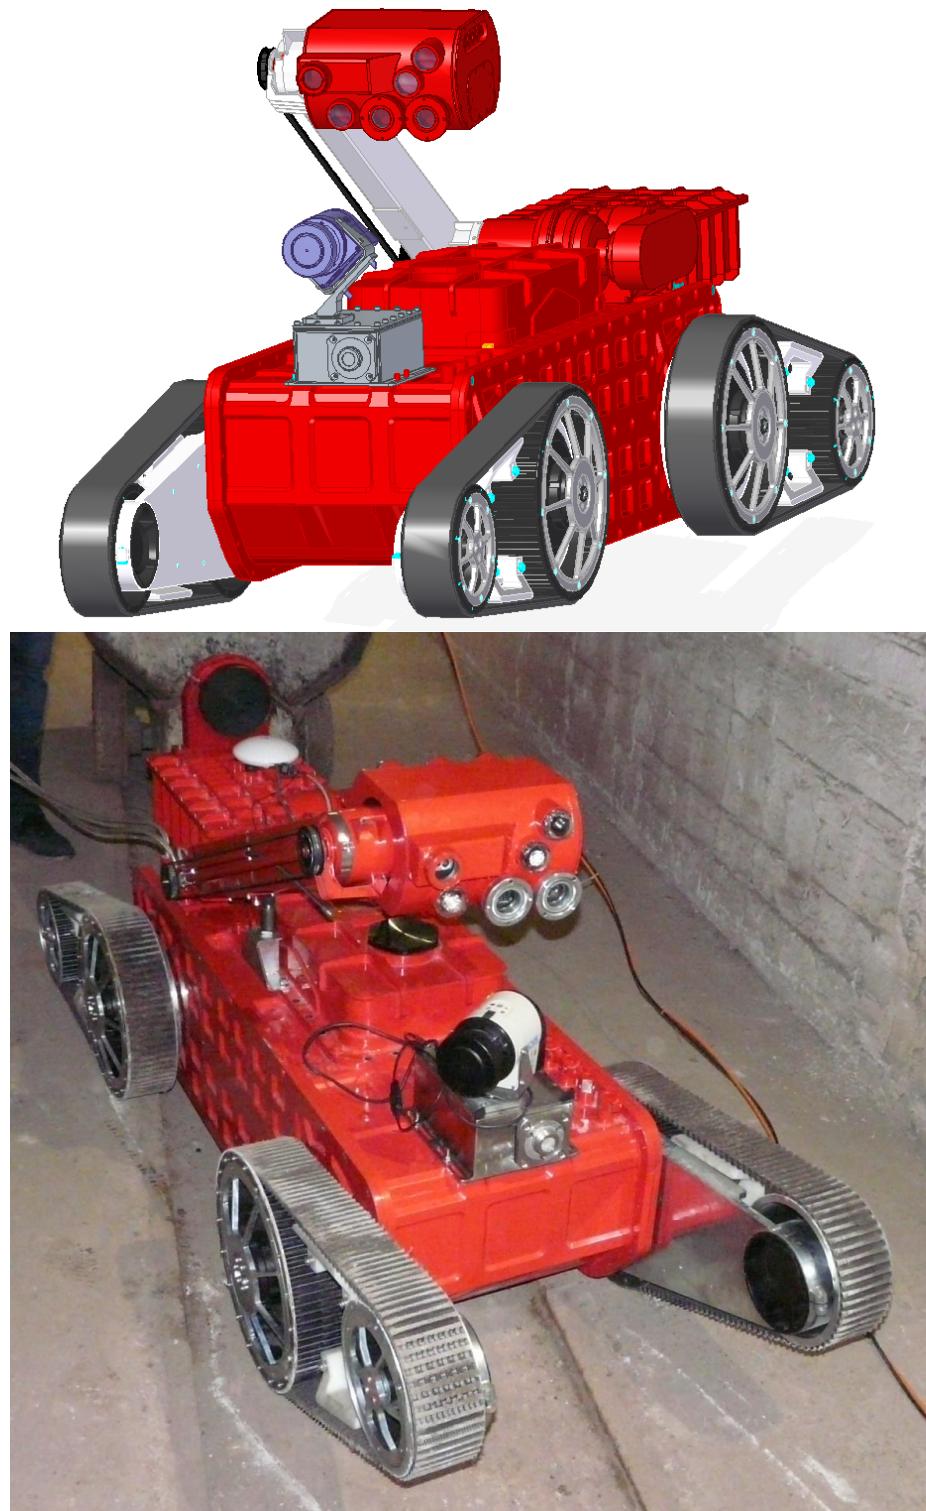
3D virtual model of finished platform and a physical prototype.
